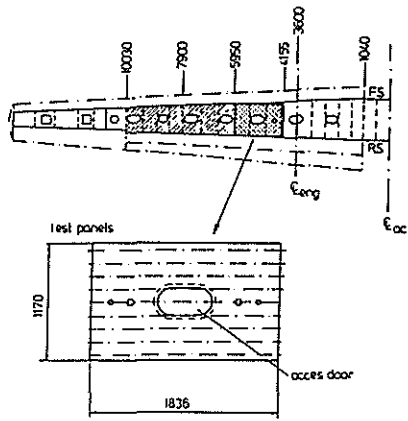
The lower skin of the outerwing of the Fokker F-27
